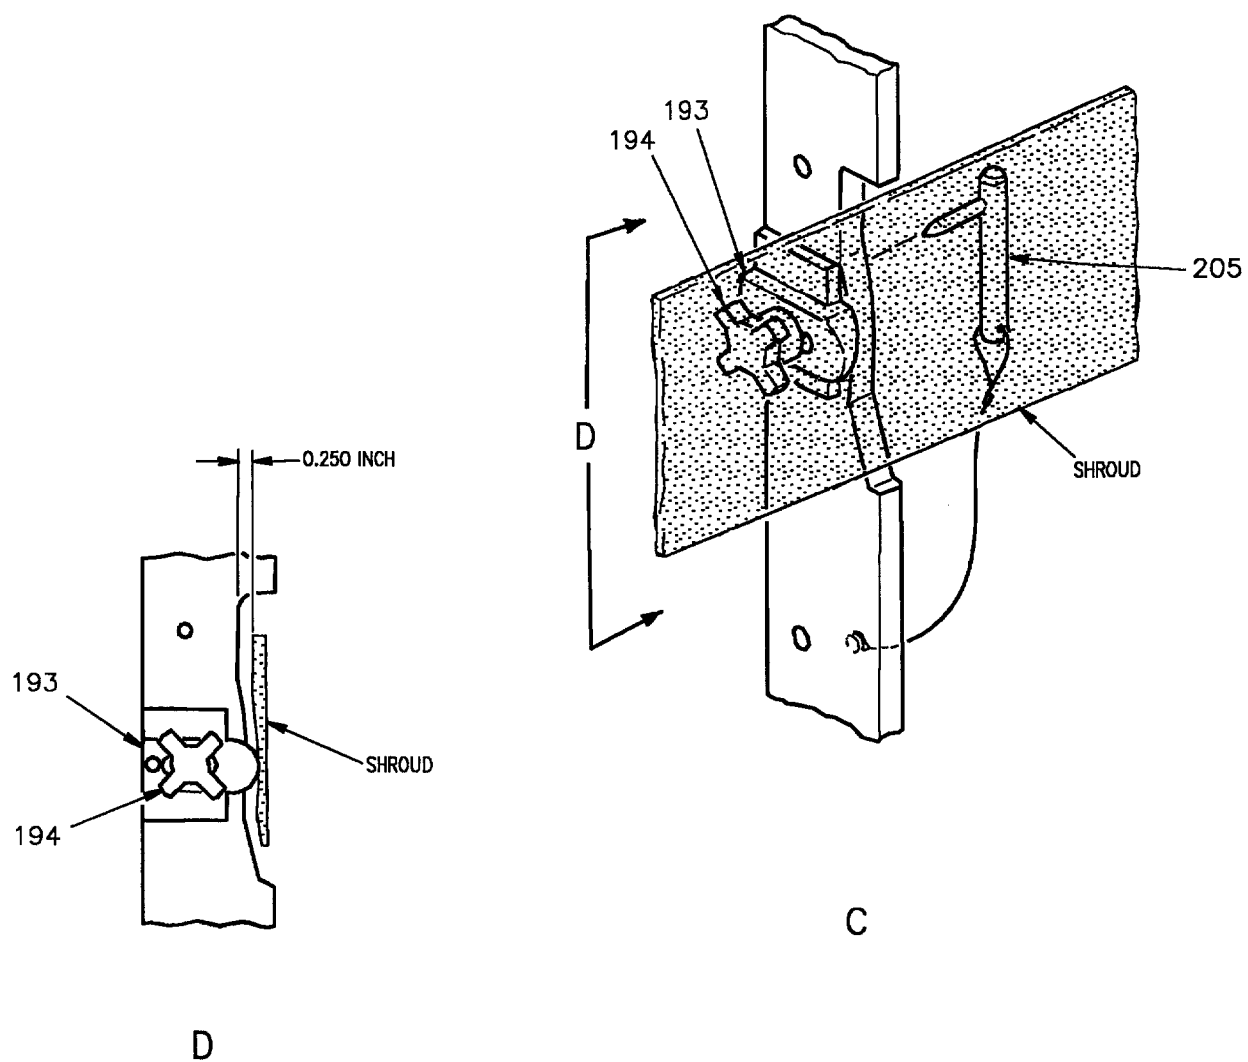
Installation of Shroud into Maintenance Fixture (Sheet 4)
